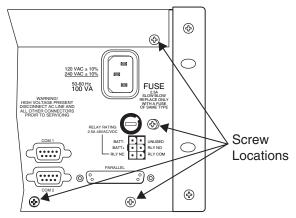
User CPU, PS, User Interface Assembly retaining Screw Locations
